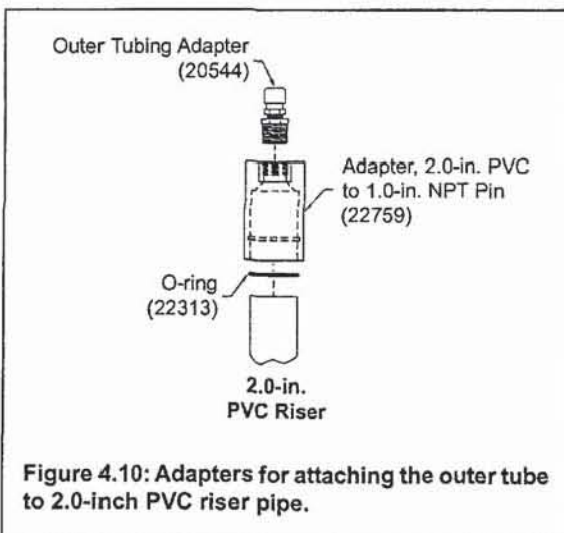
Adapters for attaching the outer tube to 2.0-inch PVC riser pipe.
